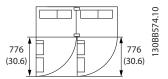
Front Clearance of IP21/IP54 Enclosure Type, Frame Size F10
